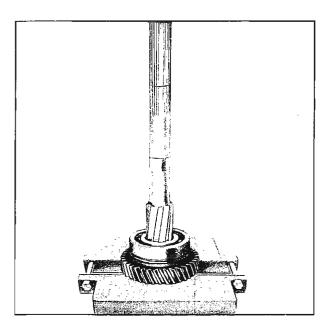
A-22 Removing Mainshaft From Rear Bearing and First Speed Gear
